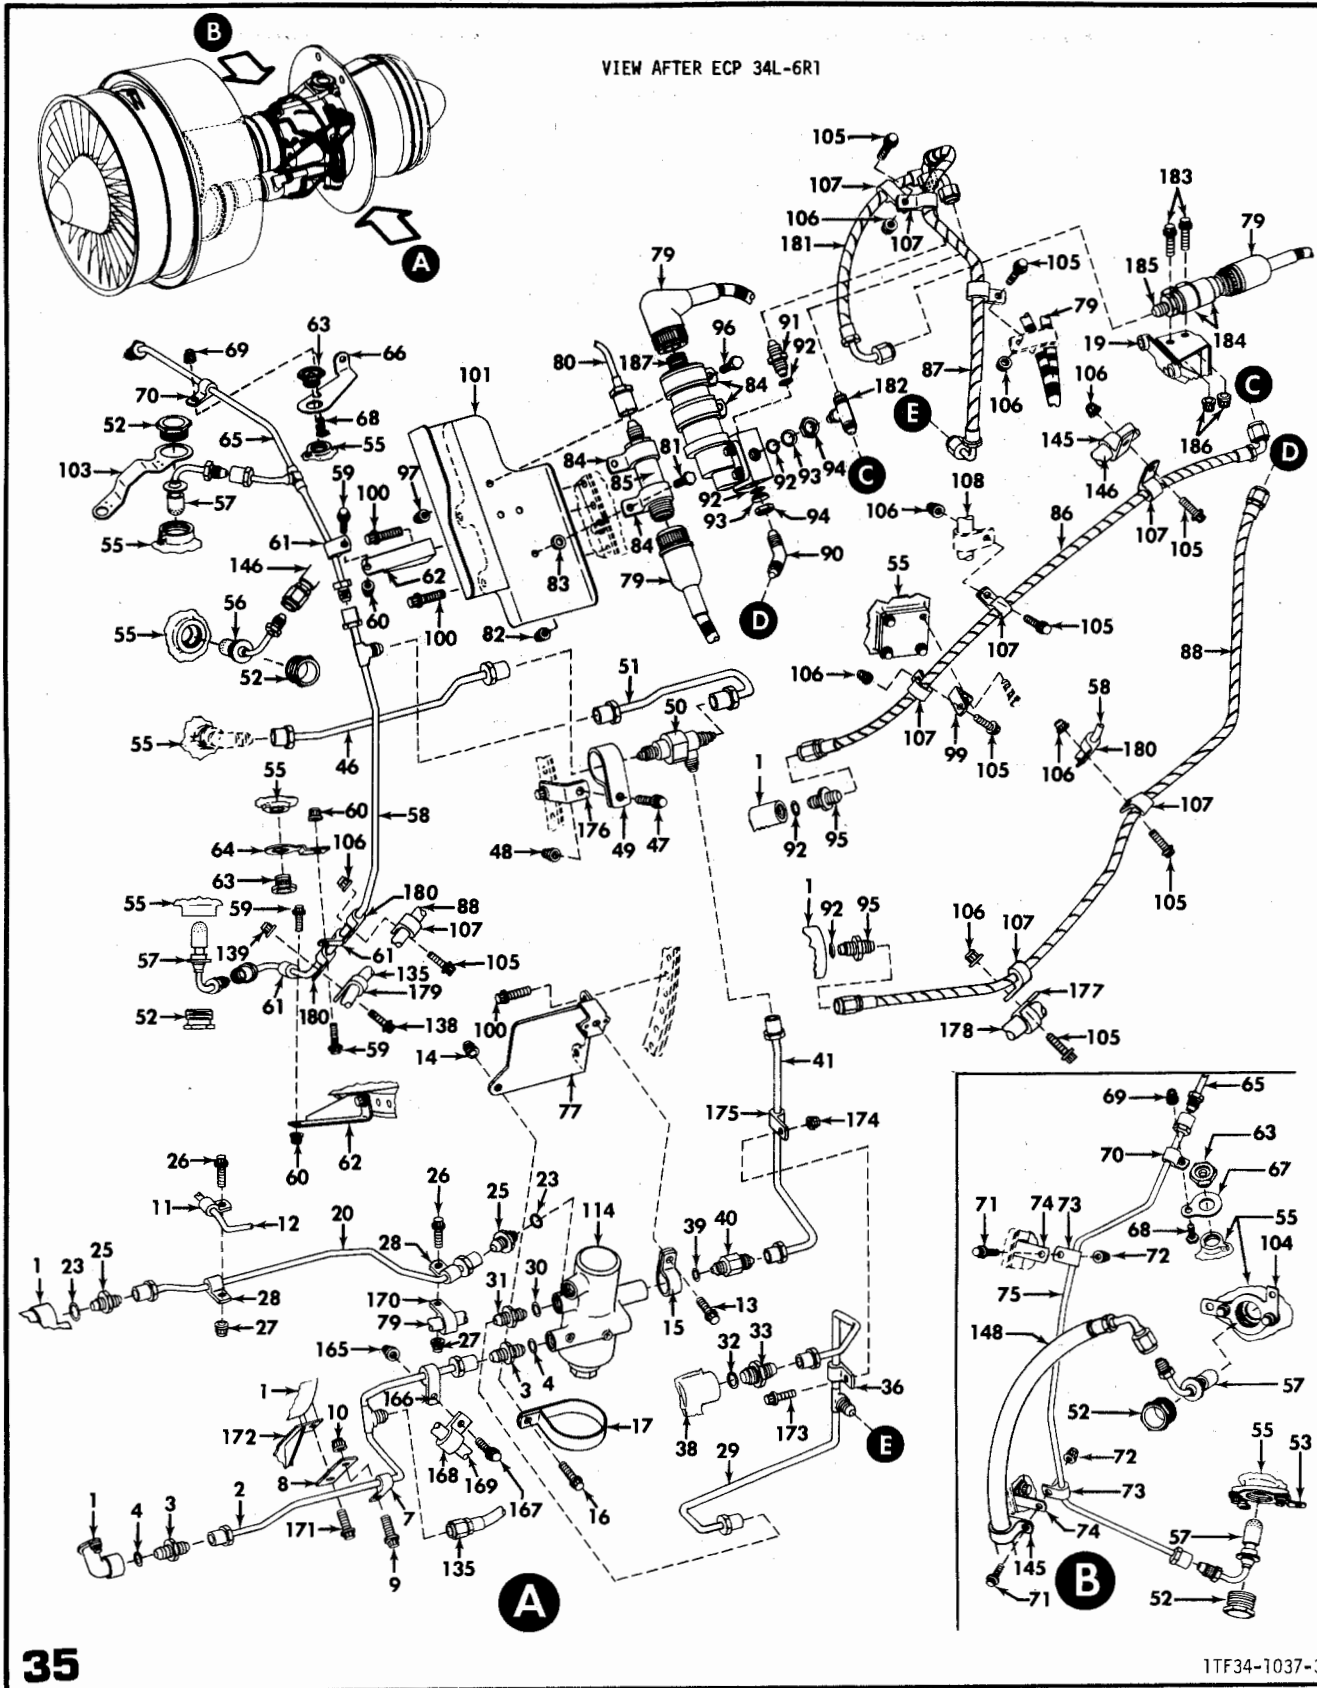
FUEL PRIMER SYSTEM COMPONENTS
